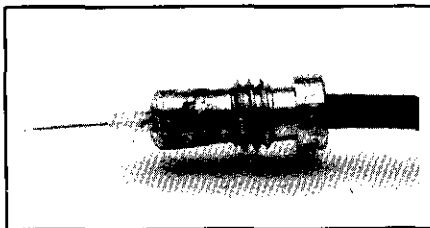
This reducer/cable assembly is ready to be turned into the connector body. Note the soldered copper foil cap at the narrow end of the reducer.
